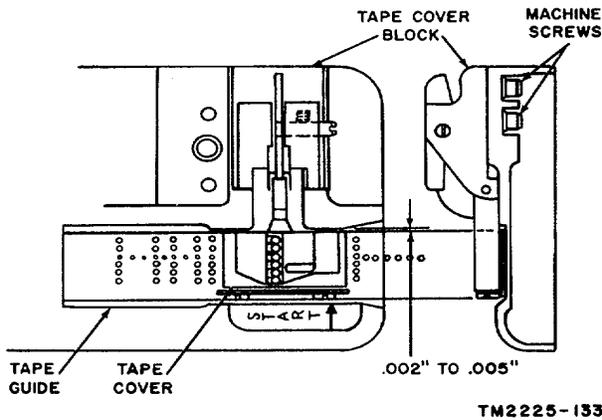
Tape cover block adjustment (TT-76A/GGC and later models).
